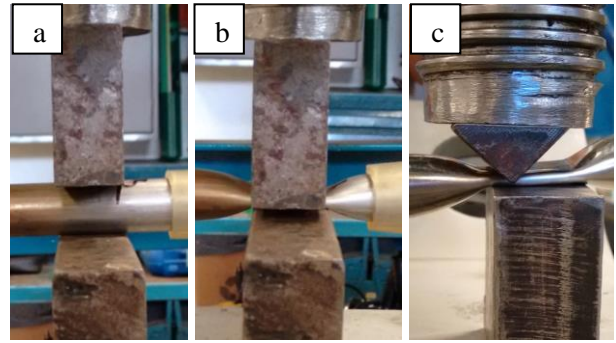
Smashing. a) tube positioned between two plane molds, b) tube after 16 ton load, c) smashing with a load of 10 ton and a wedge form mold.
